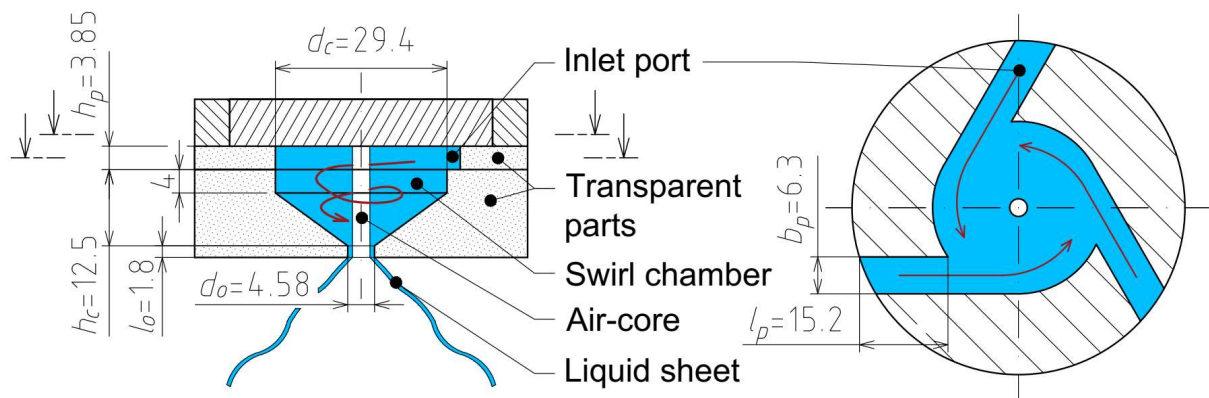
Atomizer schematic drawing with main dimensions in millimetres
